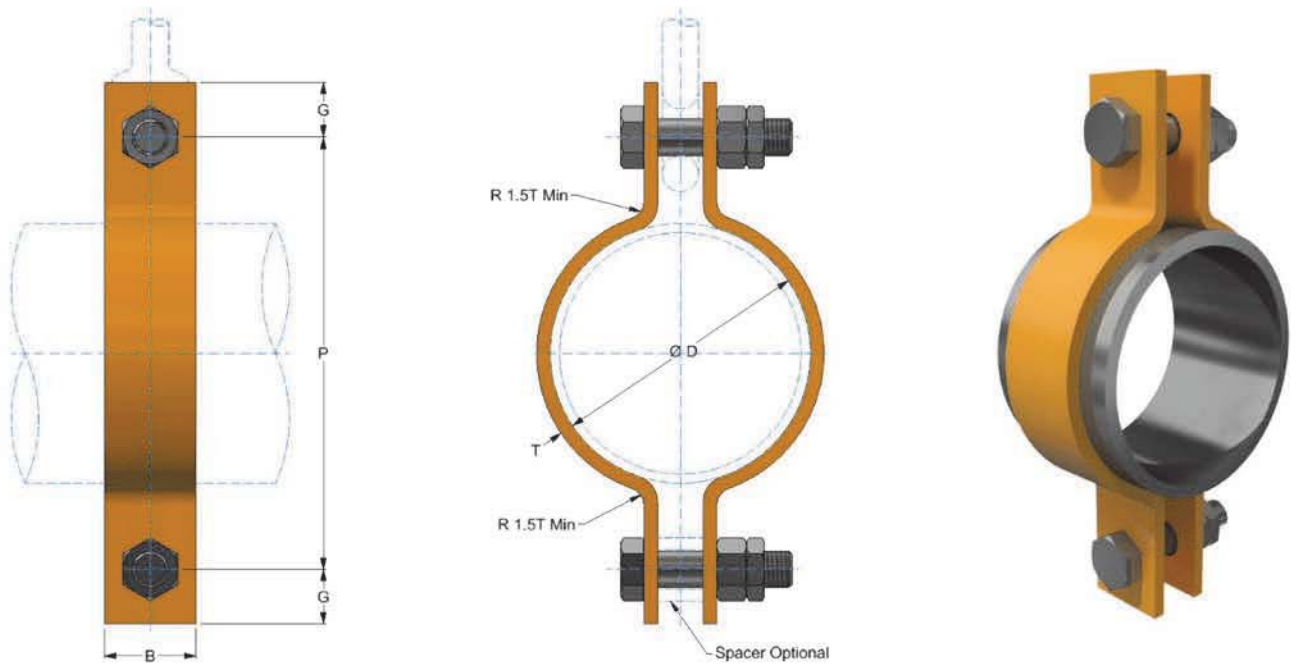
Dimensions of pipe clamps are for steel pipes (Range A: -20°C to 100°C)
